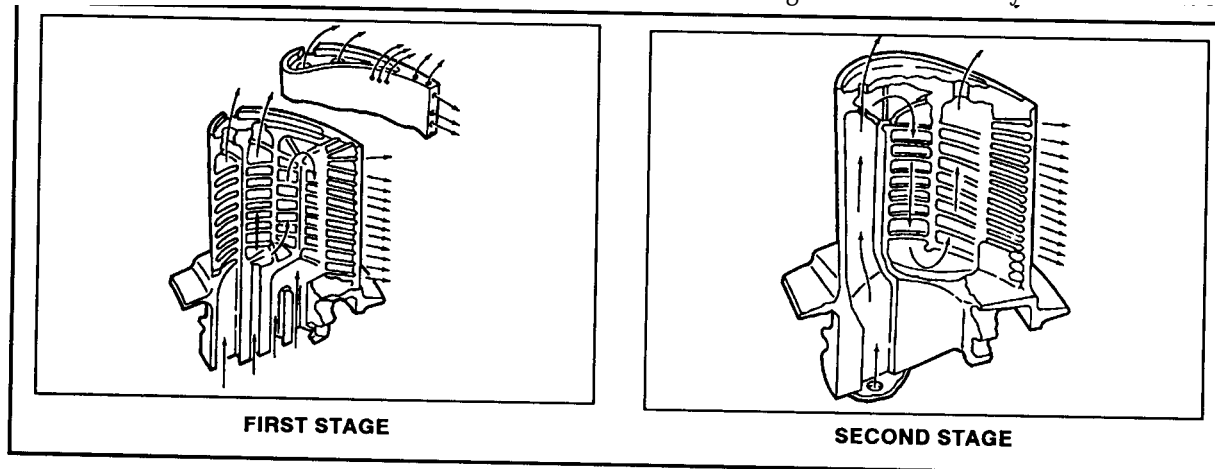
First- and Second-Stage Turbine Blade Cooling
